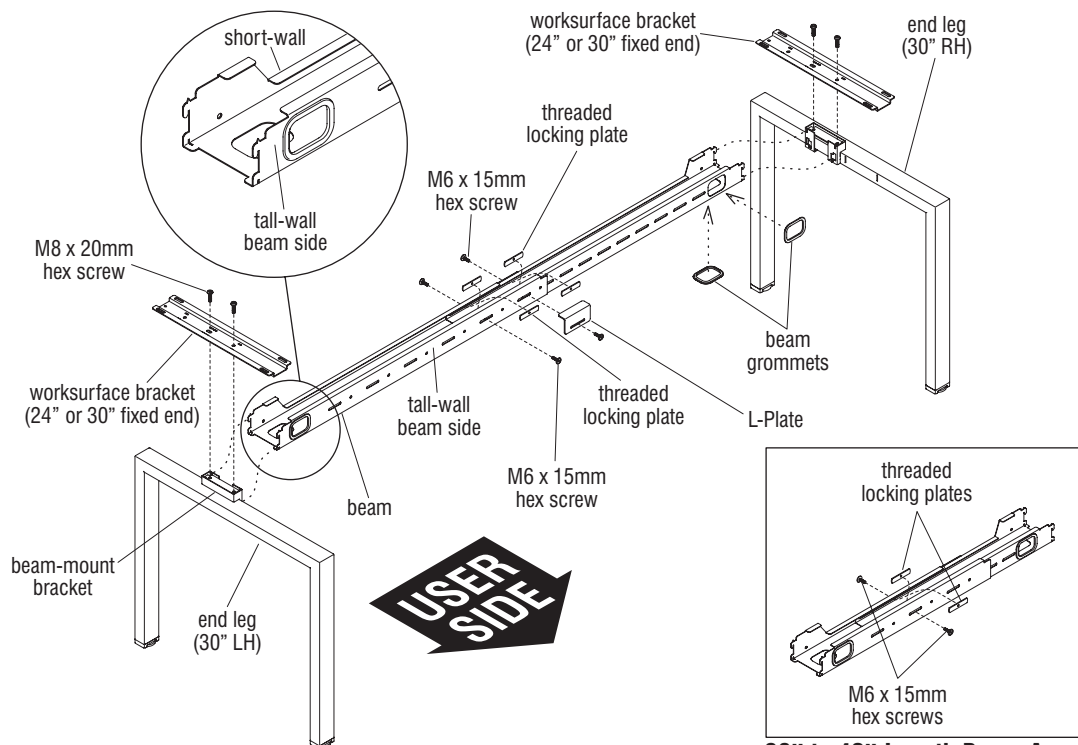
Single-Sided Fixed Benching End Legs & Beams
